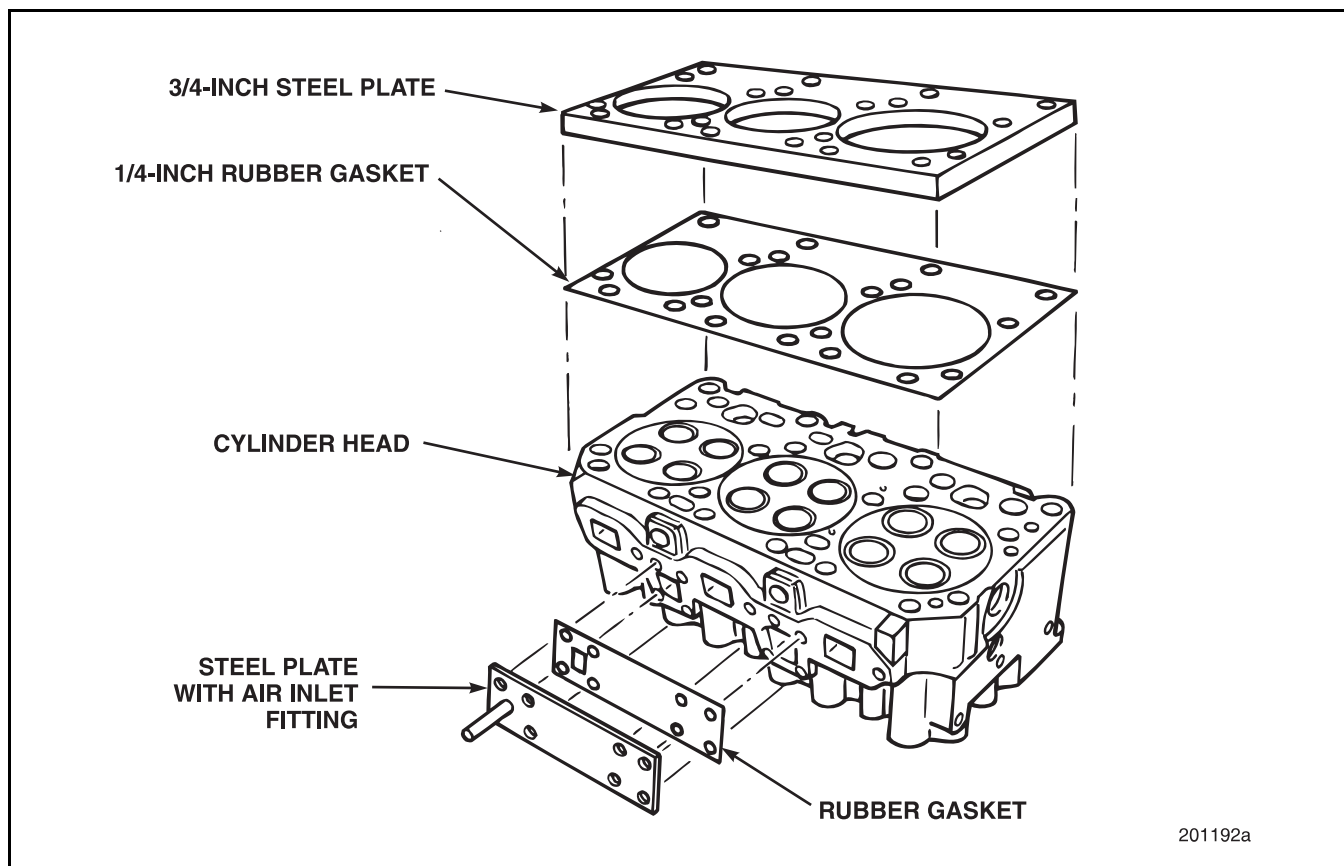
Cylinder Head Coolant Passage Leak Check (Out of Chassis)
